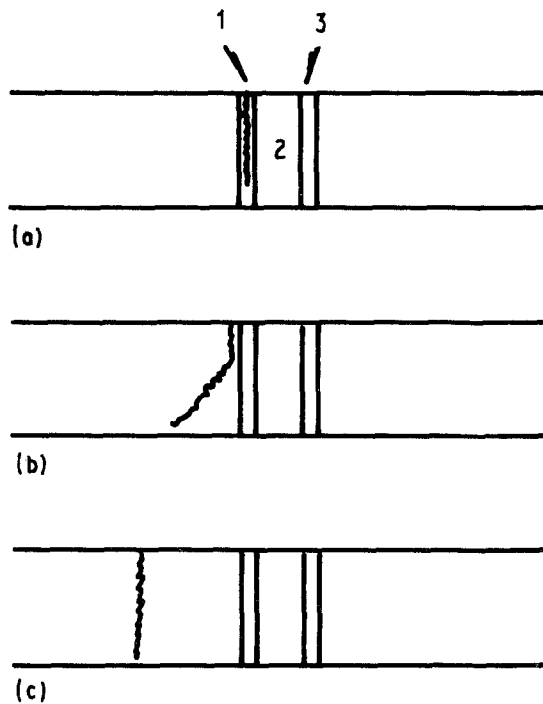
Schematic diagram illustrating three kinds of fracture of a ceramic/metal joint. 1, 3; reaction layer between ceramic and brazing filler metal or brazing filler metal and brazed metal, respectively. 2, Braze seam. (a) Fracture occurs rigorously at the ceramic/metal interface because of a low interfacial adhesion strength; (b) fracture occurs at ceramic very near the interface because of better adhesion strength between ceramic and metal, but a high residual stress there; (c) fracture is independent on the interface because of both better adhesion strength between ceramic and metal and a favourable stress gradient in the interfacial zone.
